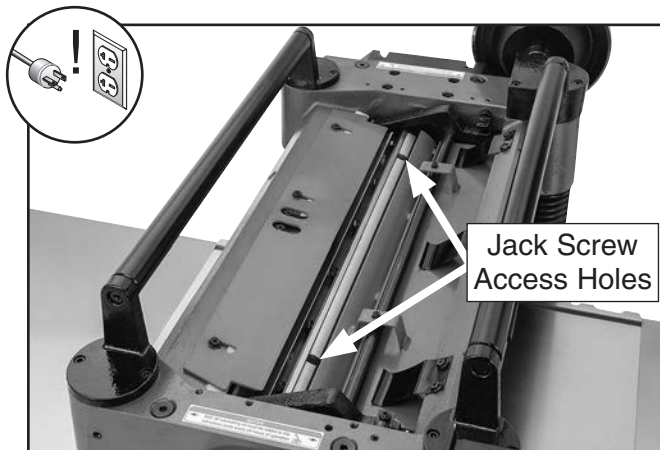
G0453W & G0454W jack screw access hole in cutterhead.
